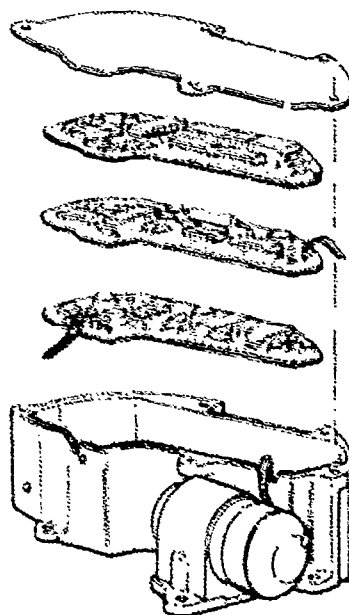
COPPERHEAD ROLL RATE SENSOR ASSEMBLY - EXPLODED VIEW
